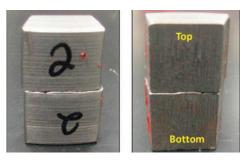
Demonstration of how workpiece was cut by sawing after broaching to generate twenty individual workpieces.individual workpieces.
